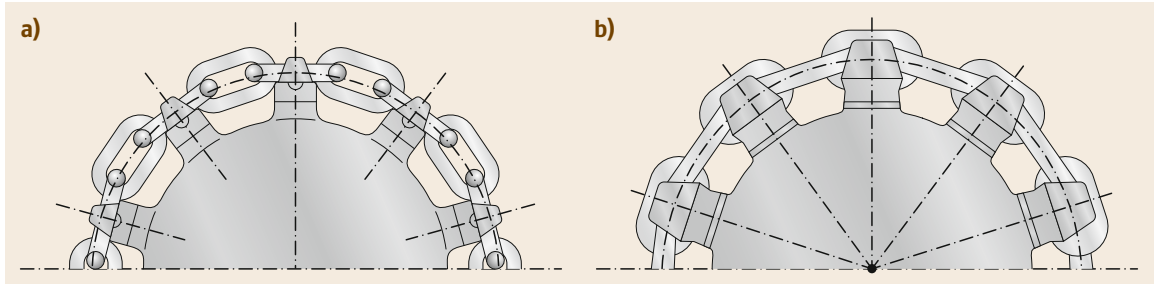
,b Sprocket wheel (a) and pocket wheel (b) for driving round steel link chains
